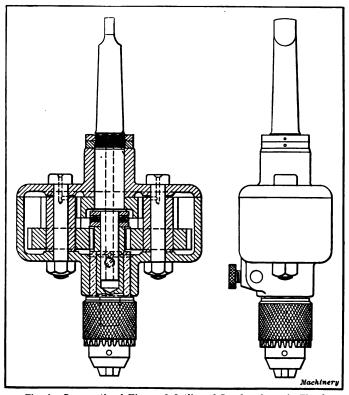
Cross-sectional View and Outline of Speeder shown in Fig. 1 commodating drills up to ¾ inch diameter. Fig. 4 shows a cross-sectional view and Fig. 3 the entire moving parts. It will be seen that the shank is of the regular taper type and has a casehardened gear fastened to it. This gear meshes with two pinions mounted on casehardened studs. A pair of
